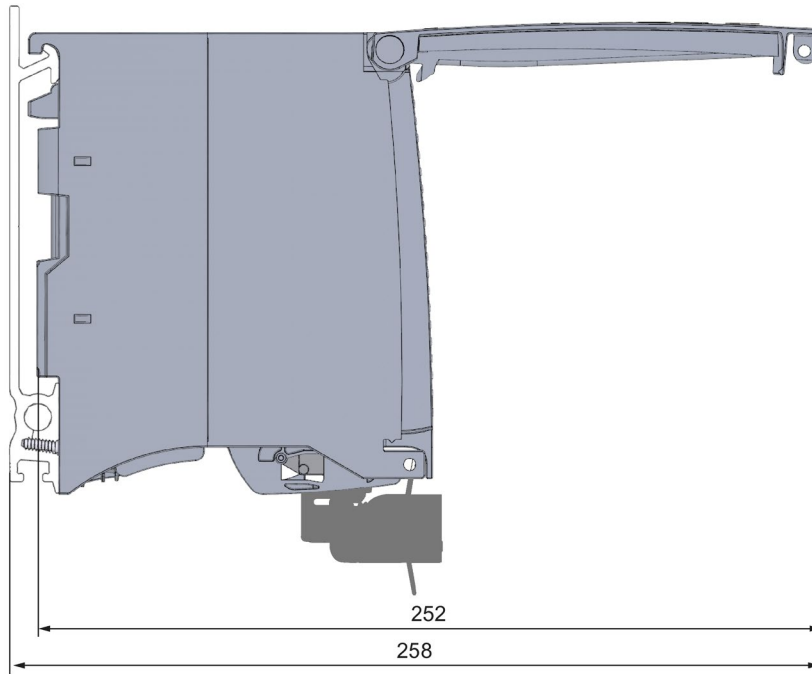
Dimension drawing of CPU 1512C-1 PN – side view with front panel open
